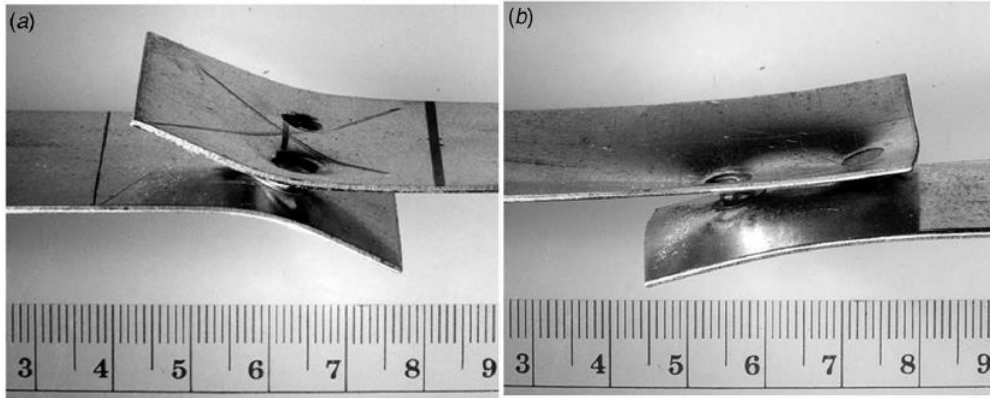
Two weld lap shear specimens with a 4.0 mm spot weld diameter [47]
